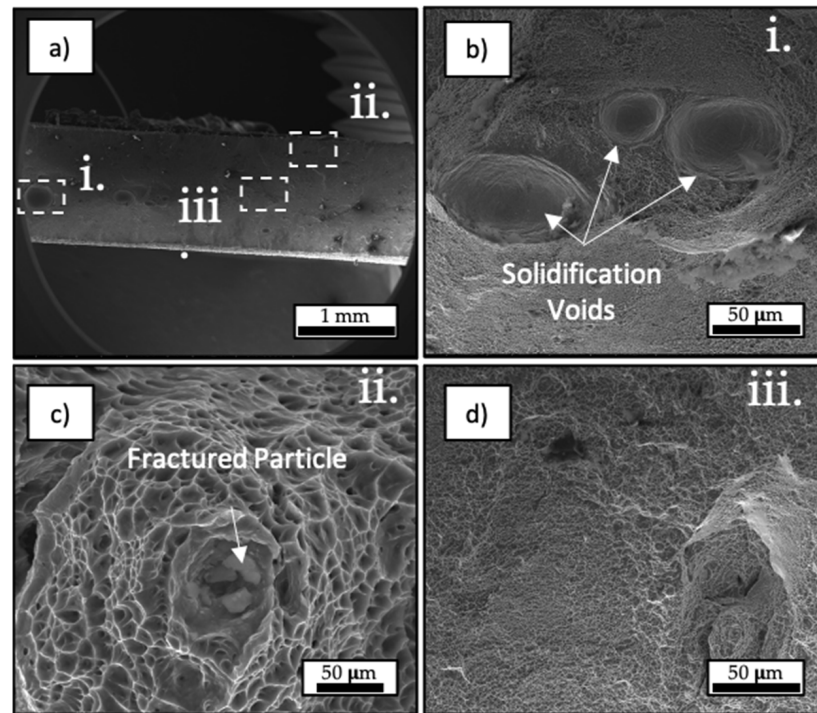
L-DED AerMet 100 mechanically tested in tension at 0.001 s^{-1} : (a) macro view of the overall failure surface, (b) solidification defect in the form of voids, (c) fractured unmelted particle, and (d) representative fracture surface.
